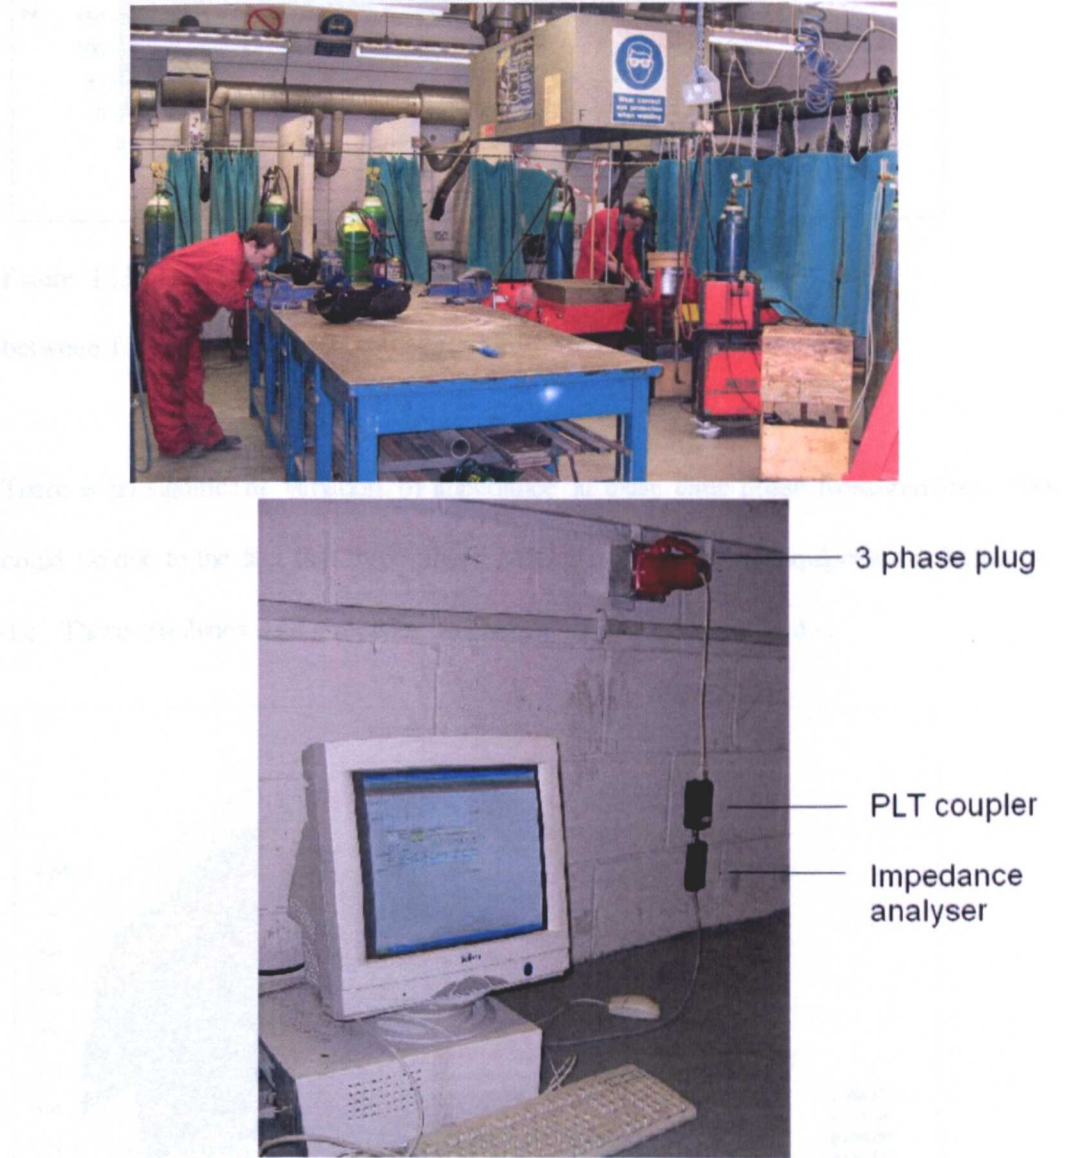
Fabrication and Welding Workshop – Three Phase (Room T21)
